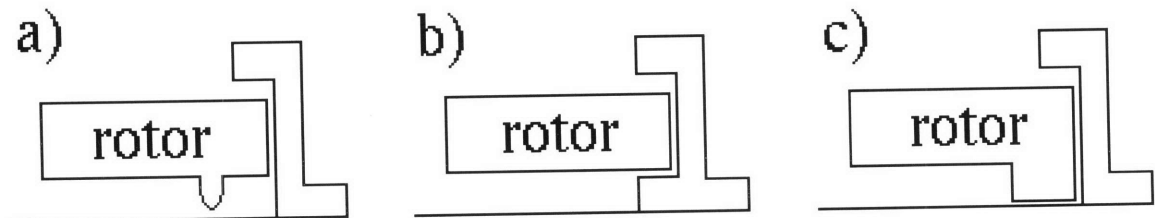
Micromotor bearing designs: a) pin bearing with dimple or collar bushing, b) flange bearing, and c) flange-collar pin bearing.
